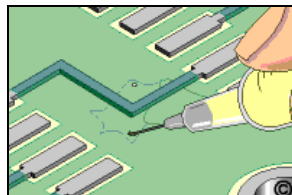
Inject Epoxy into the delamination blister using a Syringe Assembly.
